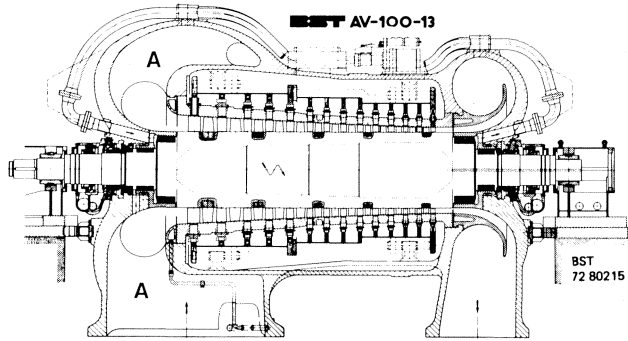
Cross-section through an axial compressor with movable guide vanes.
